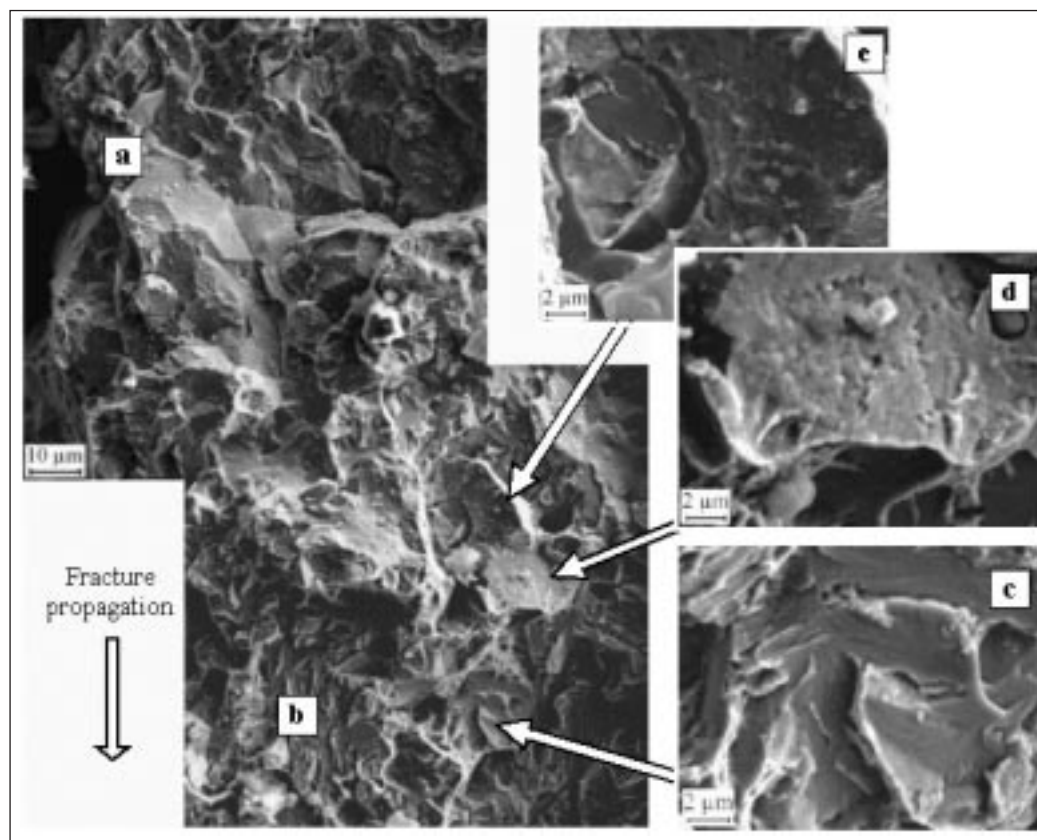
Fracture surface of 60 mm depth K_{Ic} sample. Adjacent intergranular (a) and cleavage (b) fracture areas. Details: cleavage zone (c), fracture through a segregated zone (d), isolated intergranular facets (d, e).
